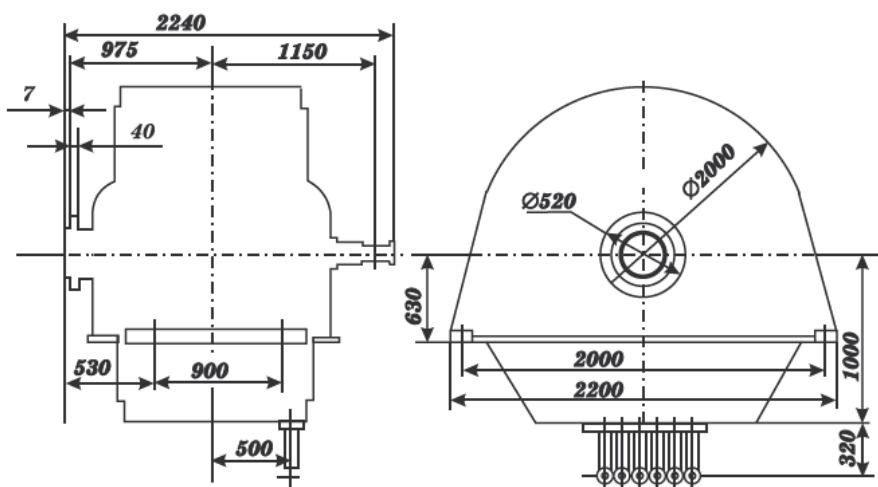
Overall and mounting dimensions of the motor AC3-2-17-61-6T3
